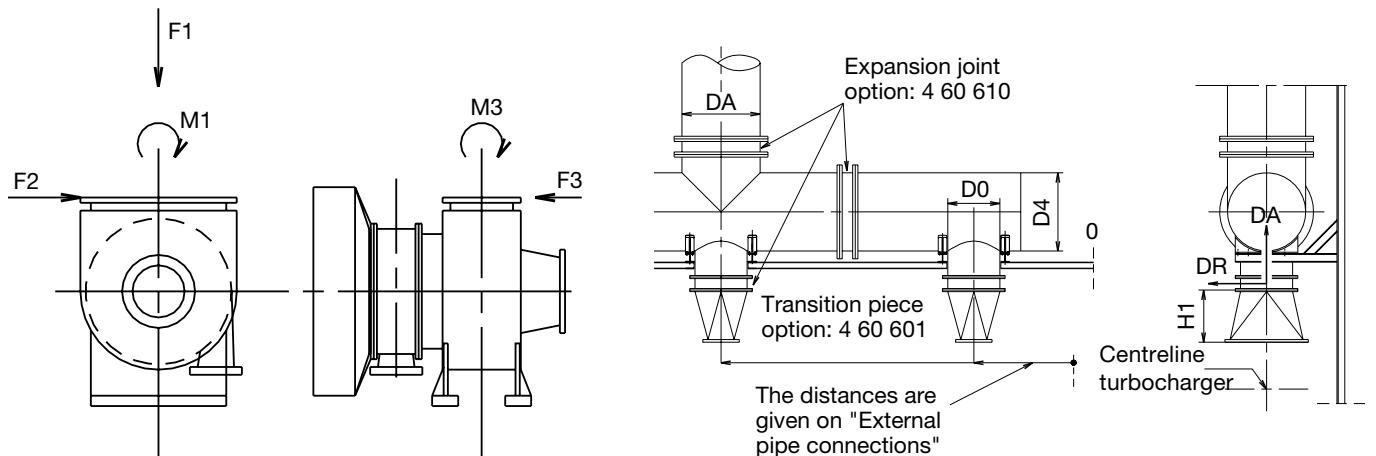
Exhaust pipe system, with turbocharger located on exhaust side of engine (4 59 122)
